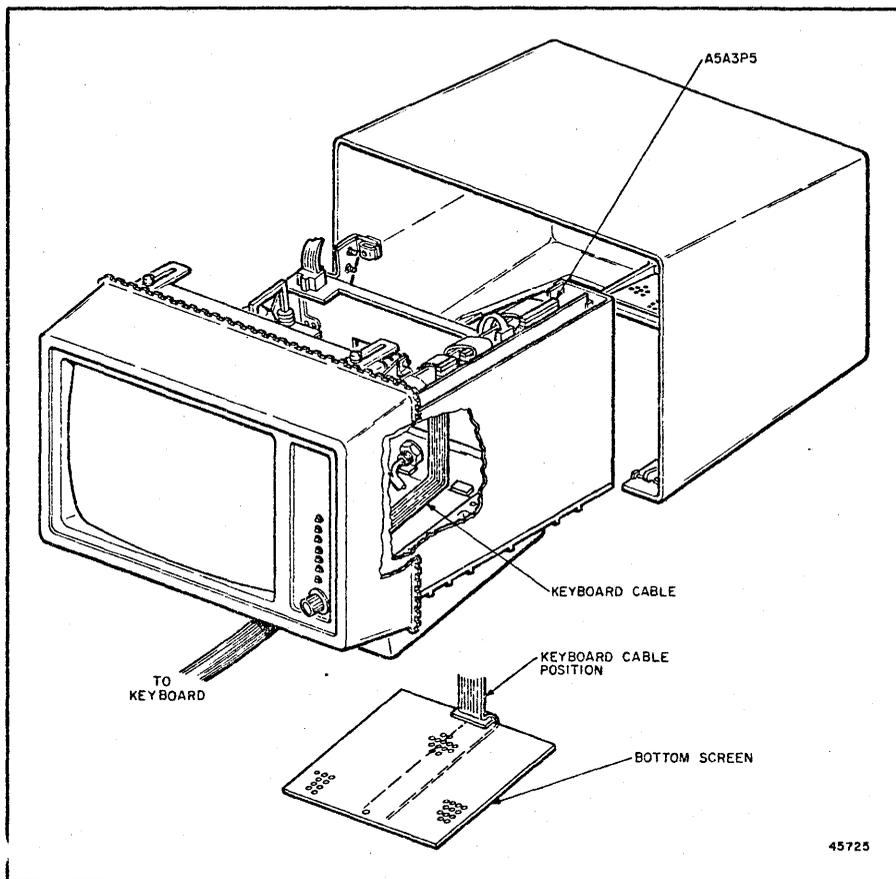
Slave Terminal - Keyboard Cable Routing
